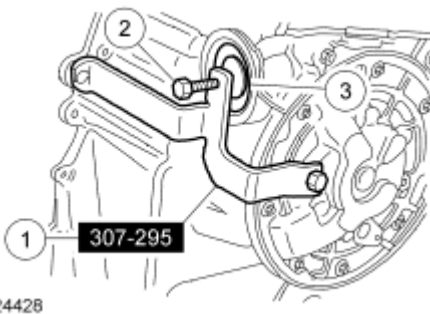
Removing Servo Retaining Ring Using Special Tools
